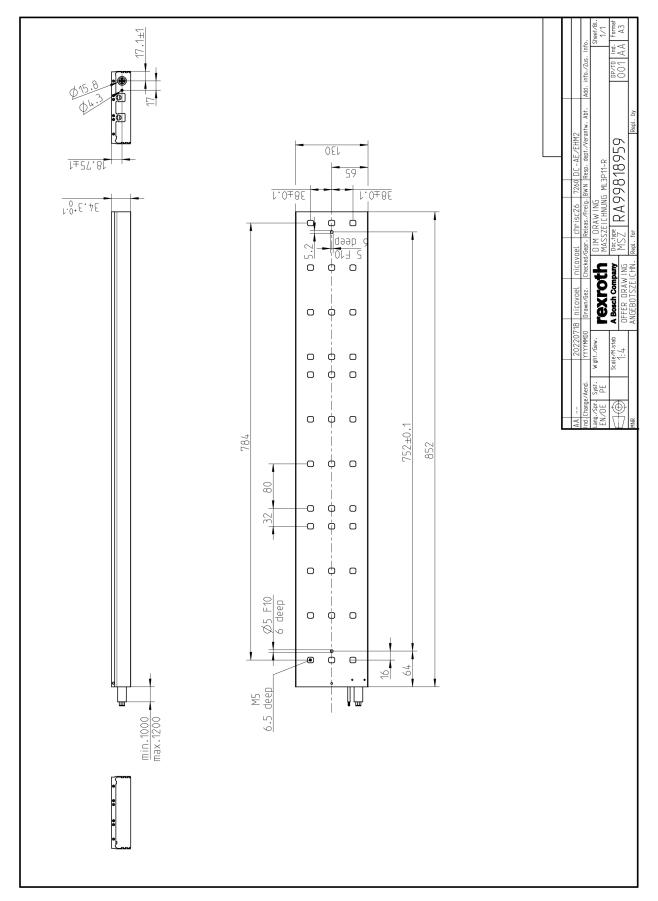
Dimension sheet ML3P11 primary part, frame length R
